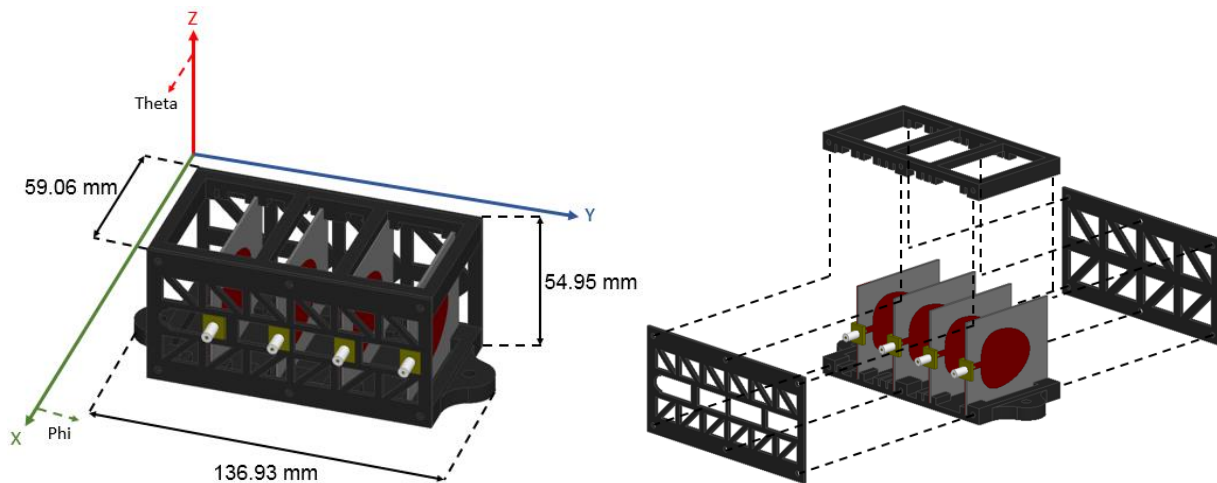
Four-element bulb array with Delrin fixture (left) and an exploded view of the array with the fixture (right)
